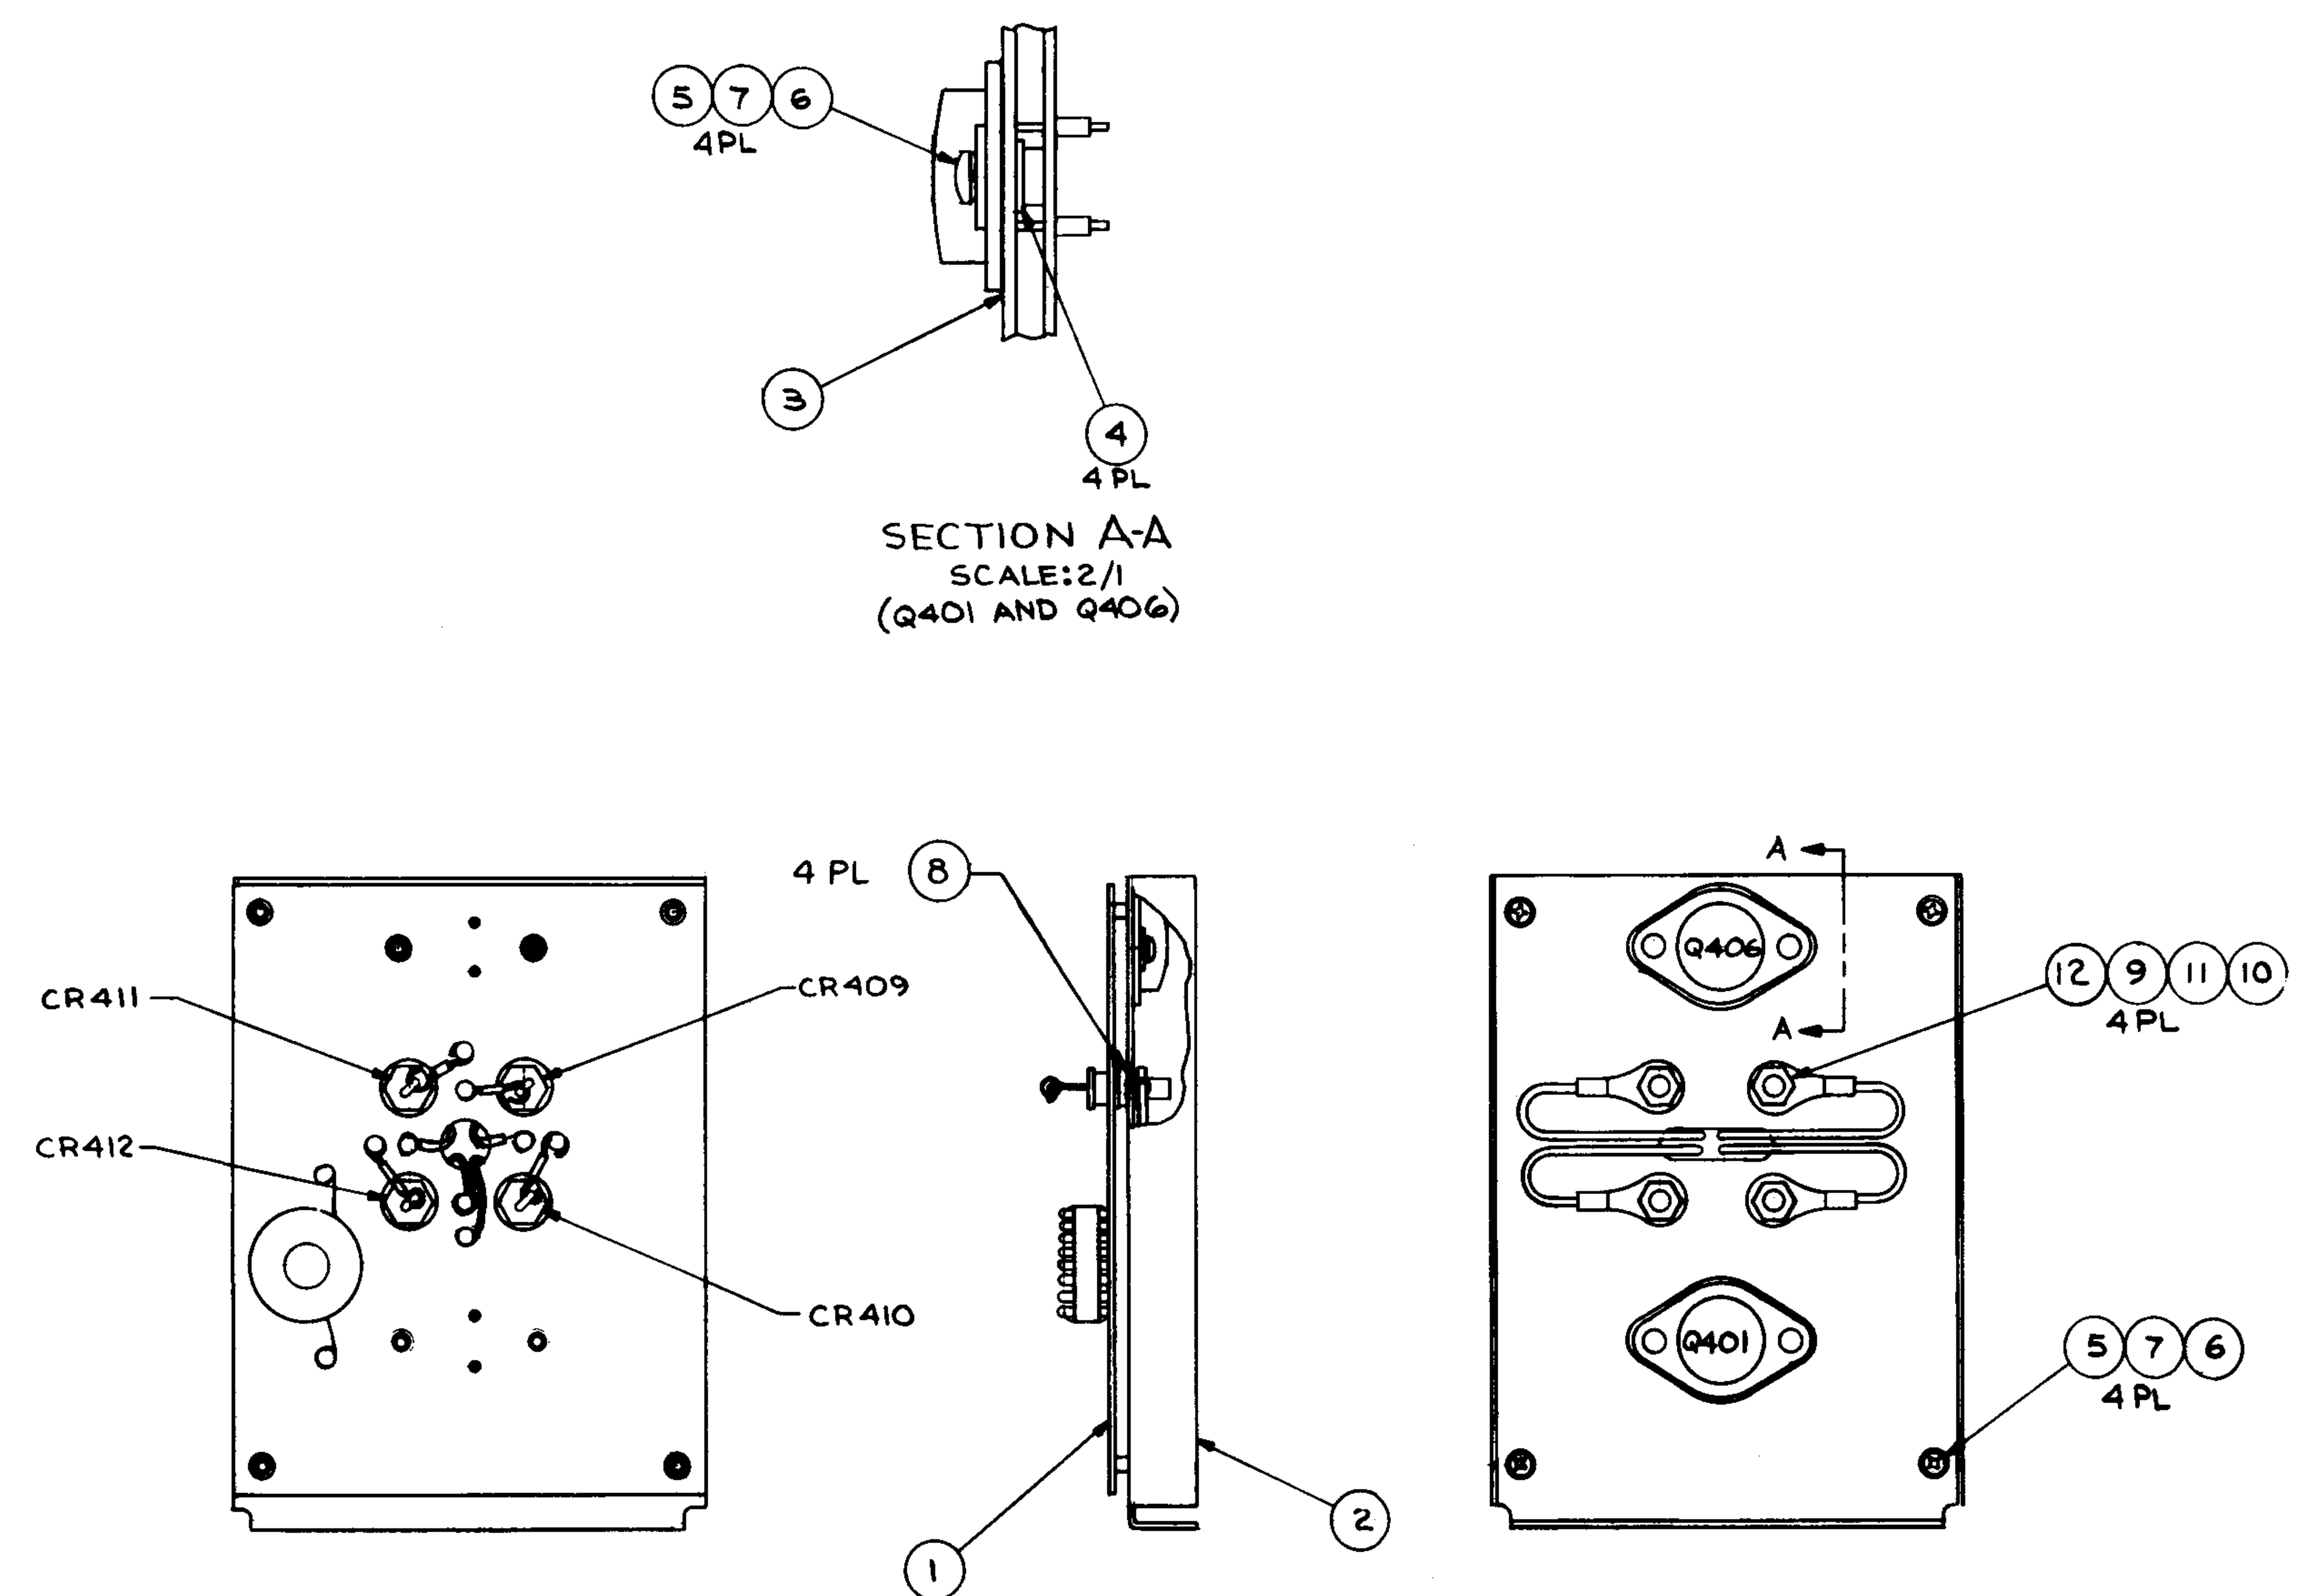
Low Voltage Power Supply Relay Module A1A4 (01-80305A68) Parts Location Diagram (Sheet 1 of 3)
